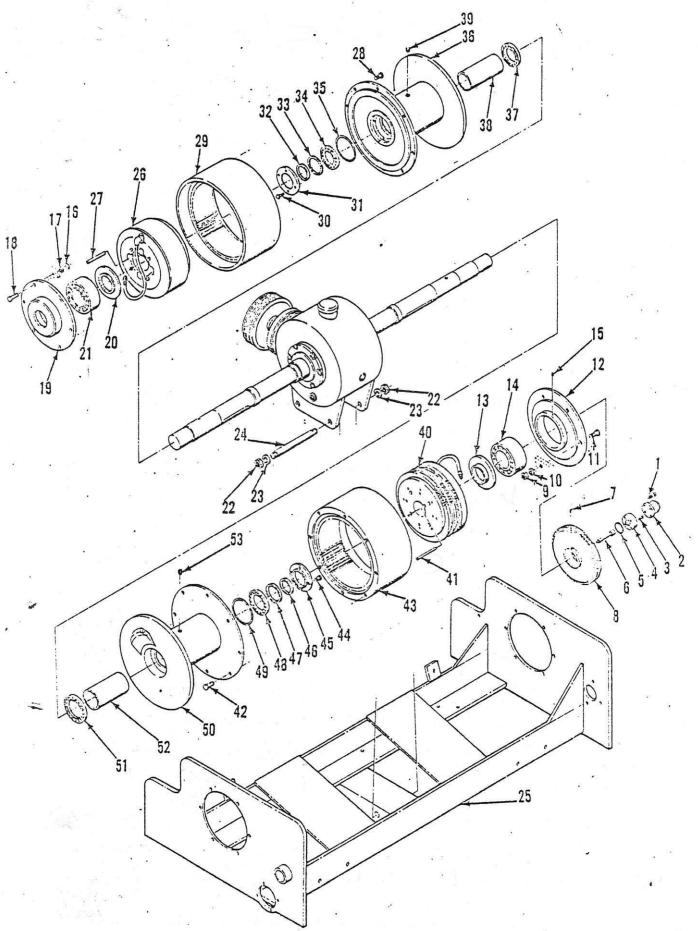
Drawworks and Drive Assembly (View 1 of 2) (with air clutches)
